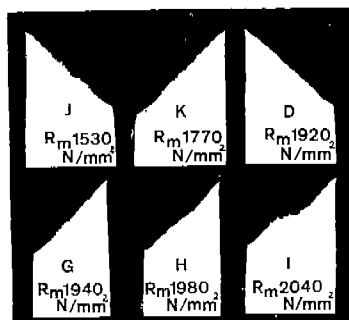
Fracture surface observed in thin strip specimens illustrated in section views.
